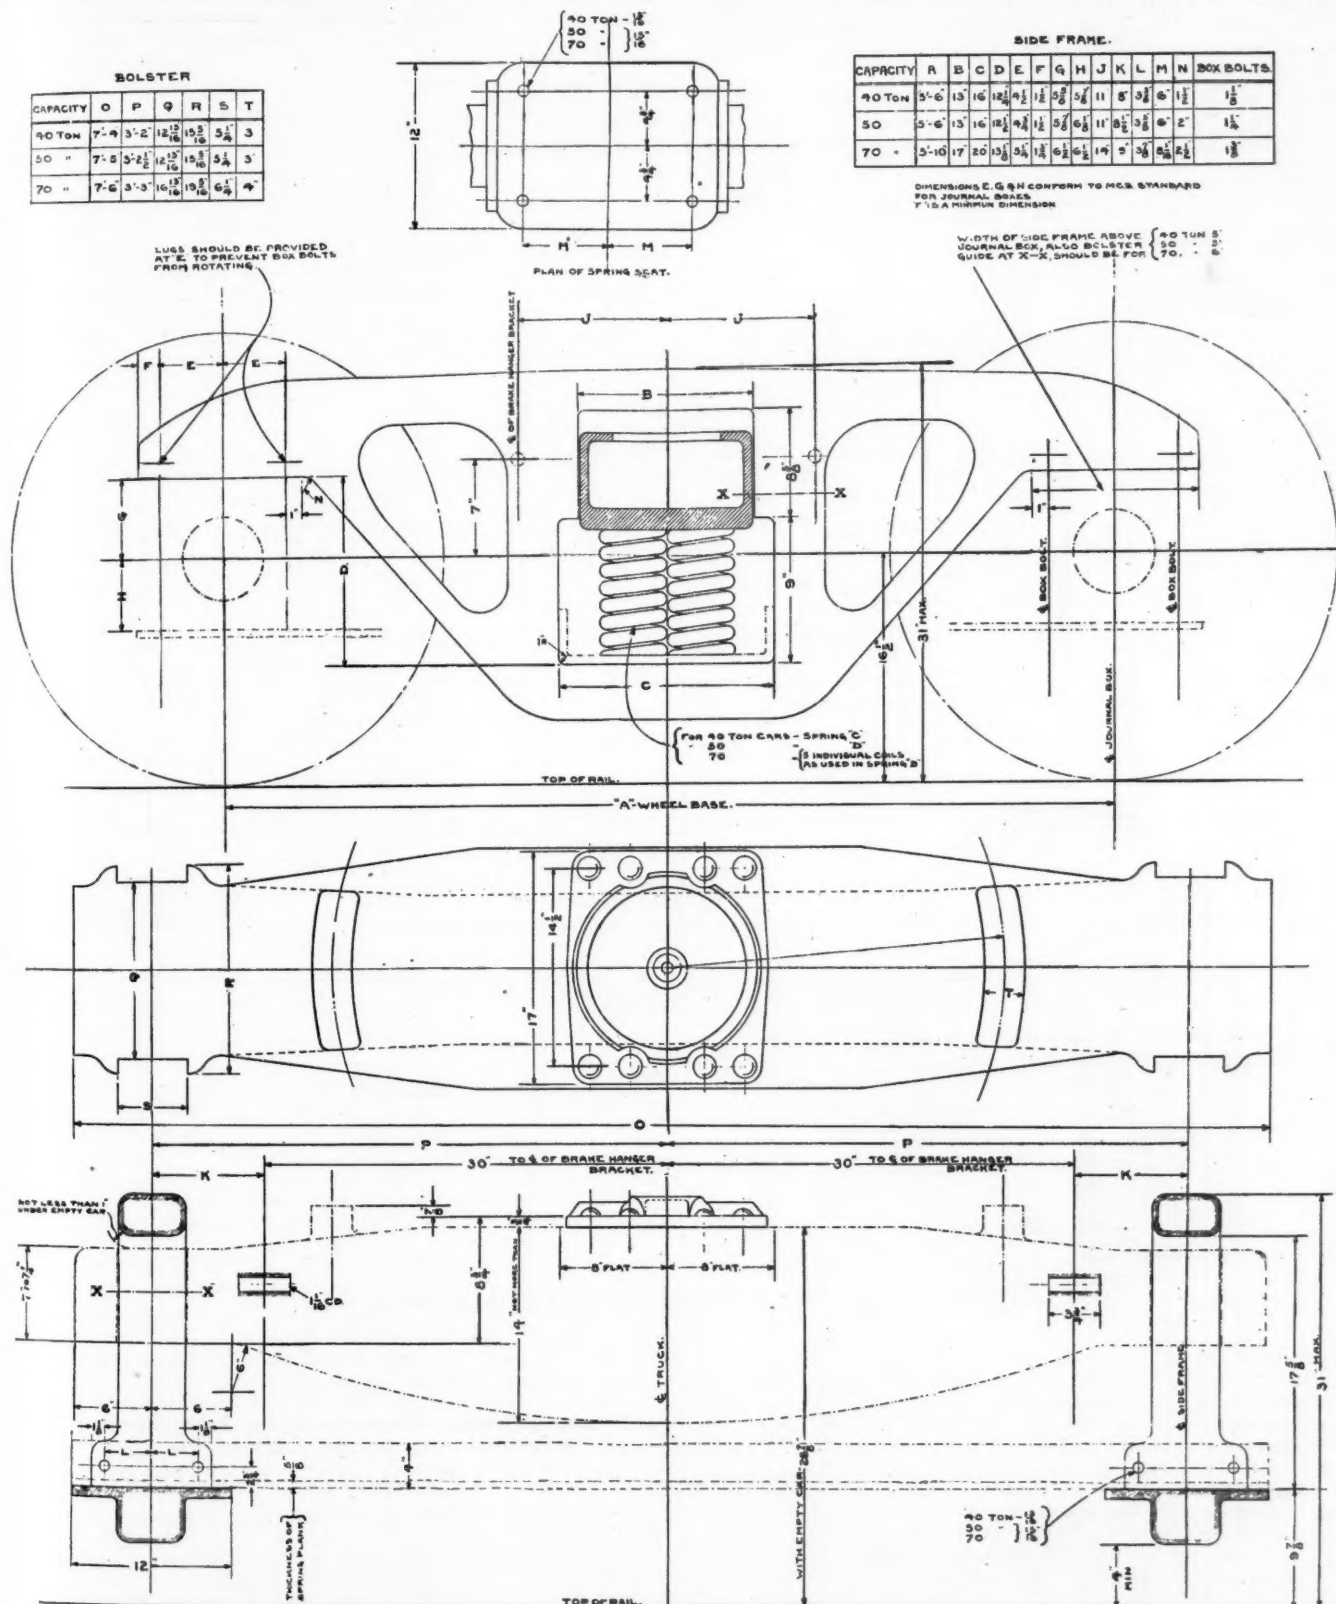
Limiting Dimensions for Cast Steel Truck Sides and Bolsters for 80,000, 100,000 and 140,000 lb. Capacity Cars
